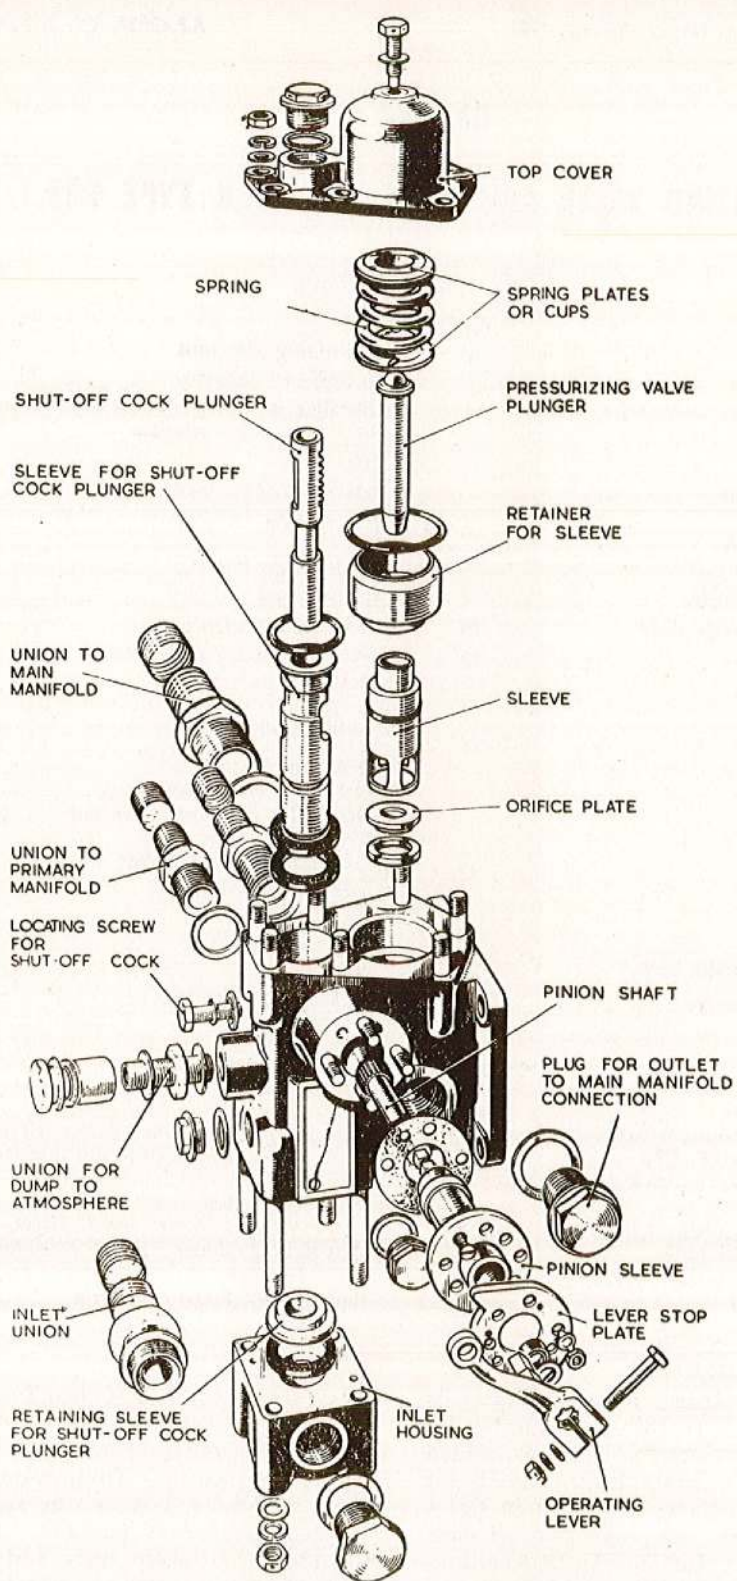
Dismantled view of pressurizing valve and shut-off cock unit, Type PVS.1/7D
